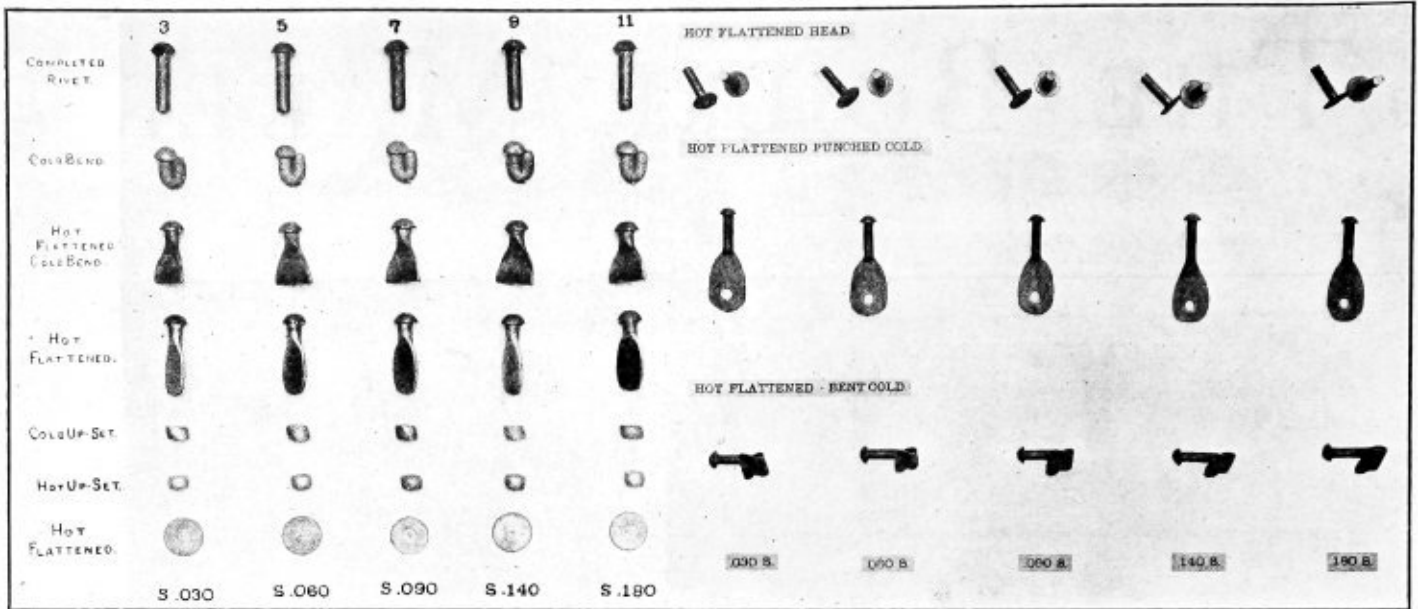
Hot and Cold Forging Tests, 3/4-Inch Rivets
